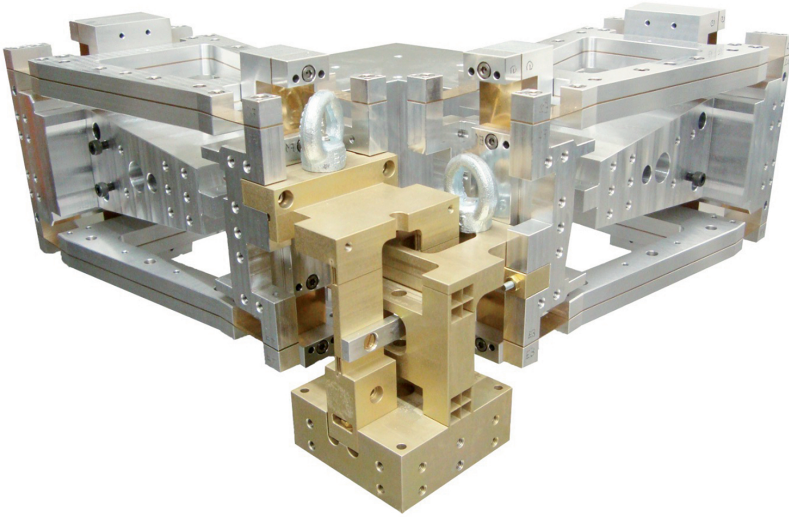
Photograph of the Sarrus prototype. The parallelograms are assembled with CuBe2 leaf springs sandwiched between aluminium plates and the output parts are electroeroded in solid aluminium.
